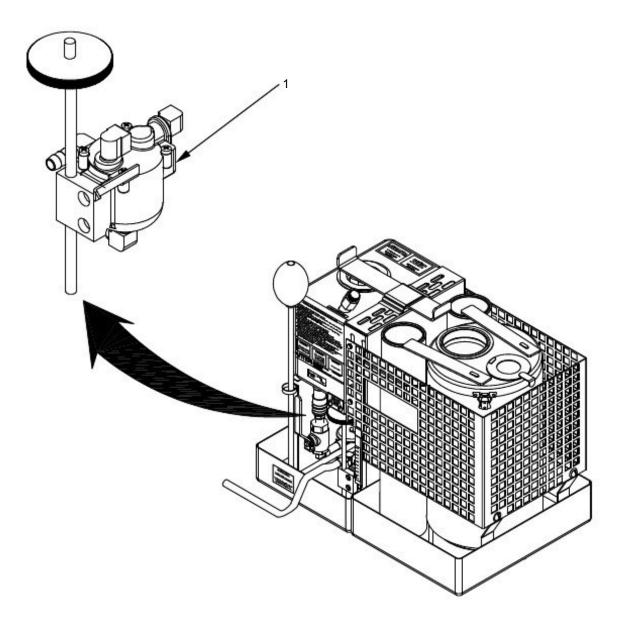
Group 07 Regulating Float Valve Assembly 0037 00-(1 Blank)/2
